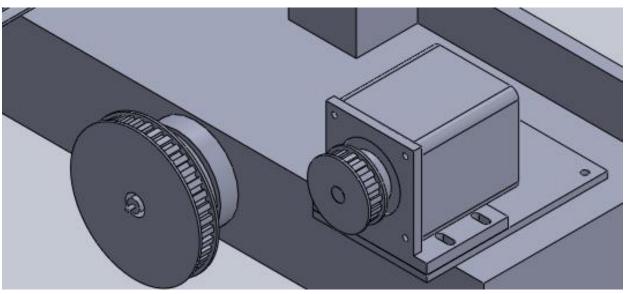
Mounting of Y-Axis Motor (without timing belt)
